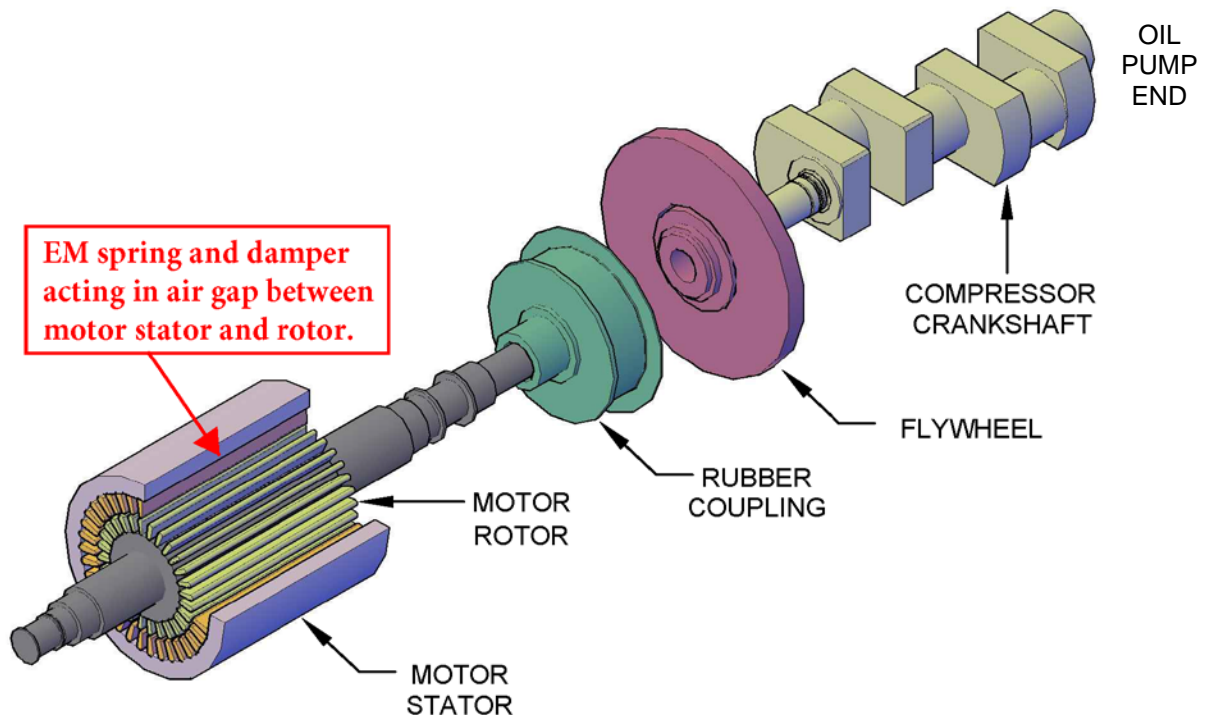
Diagram of VFD Motor-Driven Reciprocating Compressor System
